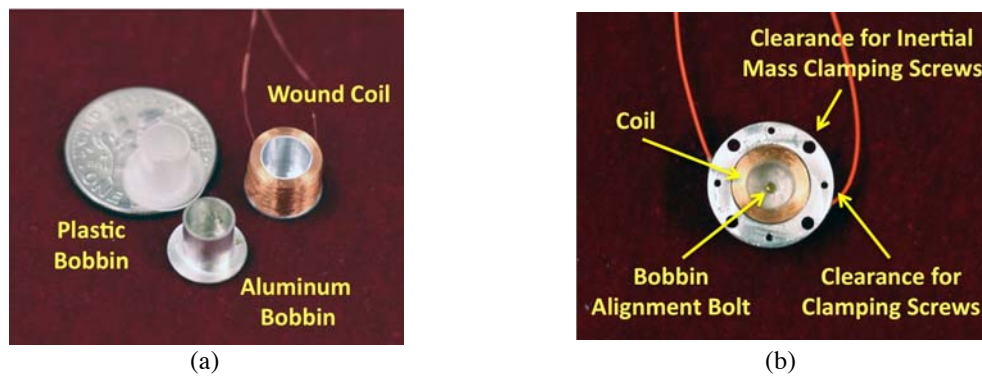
a) FIG coil bobbin and finished coil. b) Coil assembled inside FIG.
